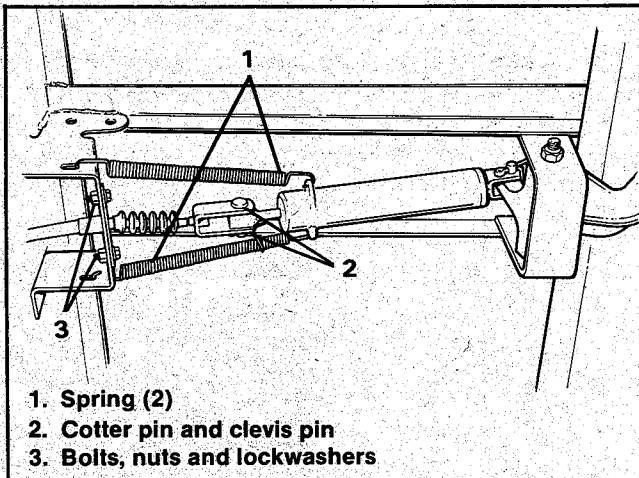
Brake Cable that is Secured with Two Bolts, Washers and Locknuts
